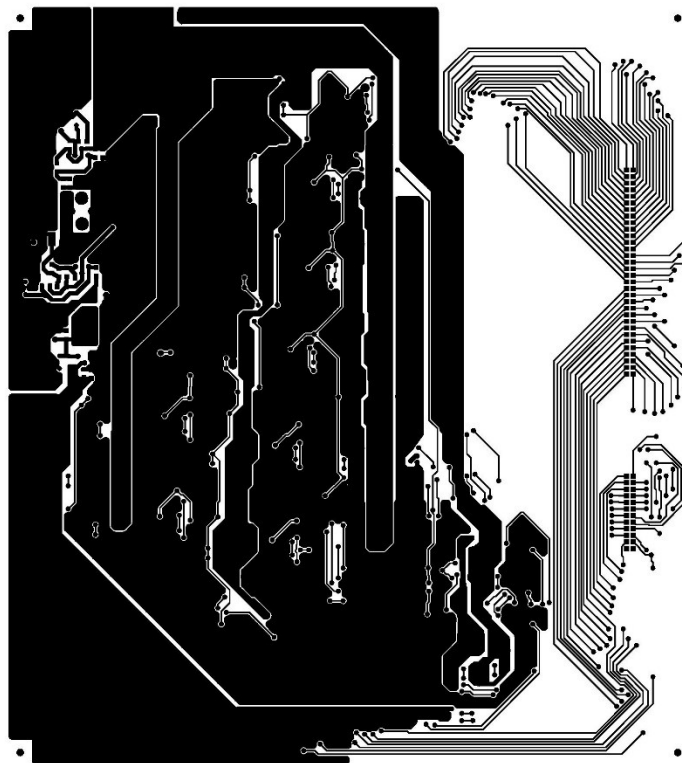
MOSFET Gate Control Board PCB Mask Bottom
